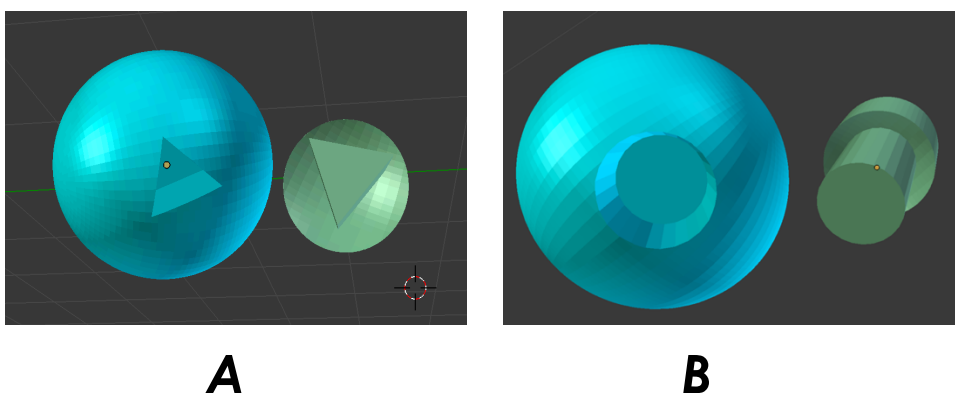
A) A 3-sided pin-and-hole mechanism. B) A 25-sided pin-and-hole mechanism
